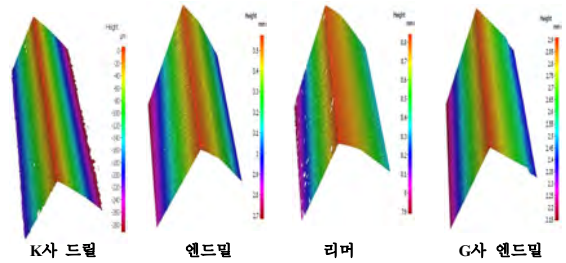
Edge radius trends of commercial PCD cutting tools.
